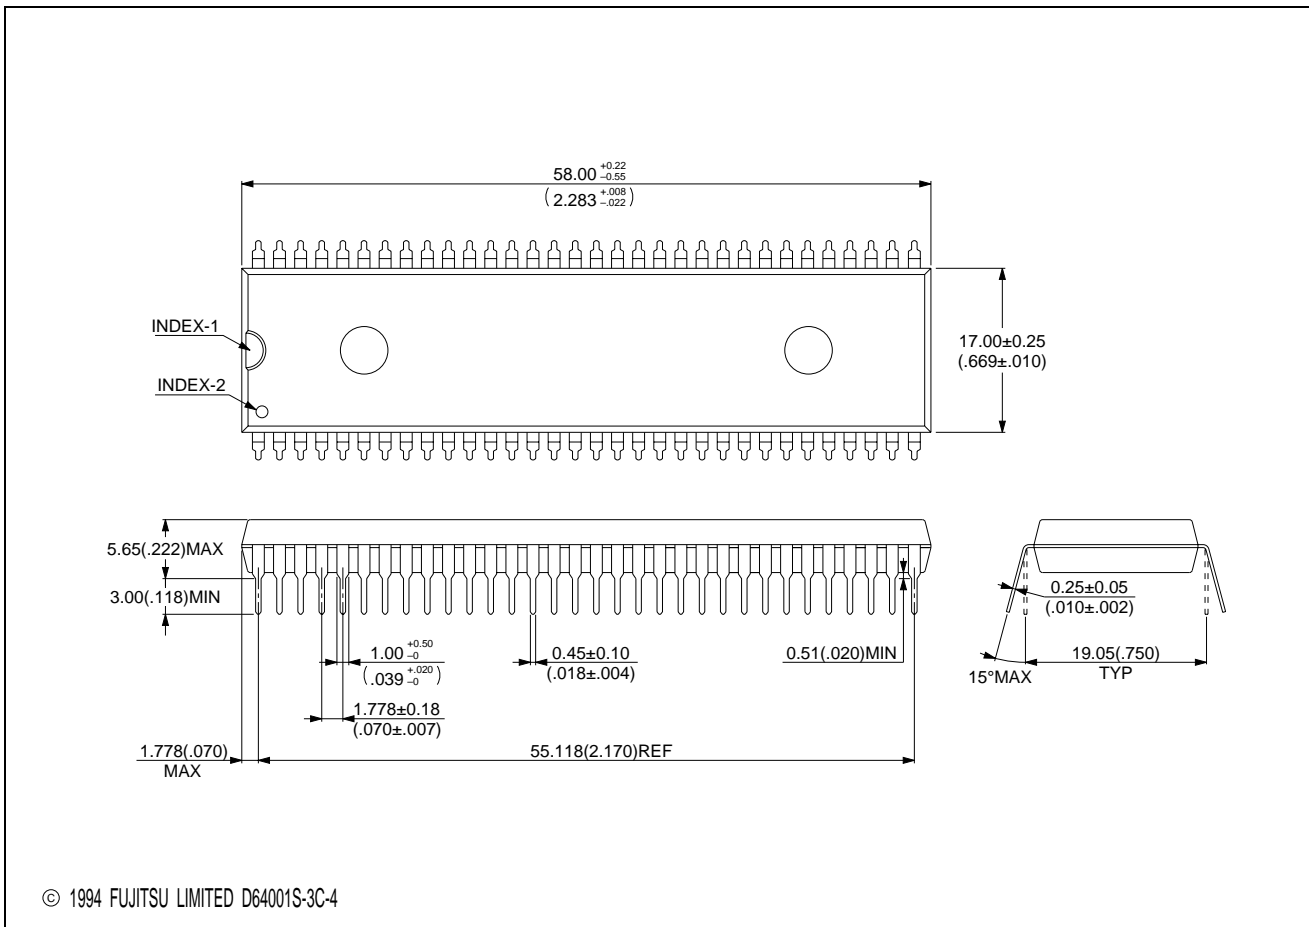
Dimensions of DIP-64P-M01 package
